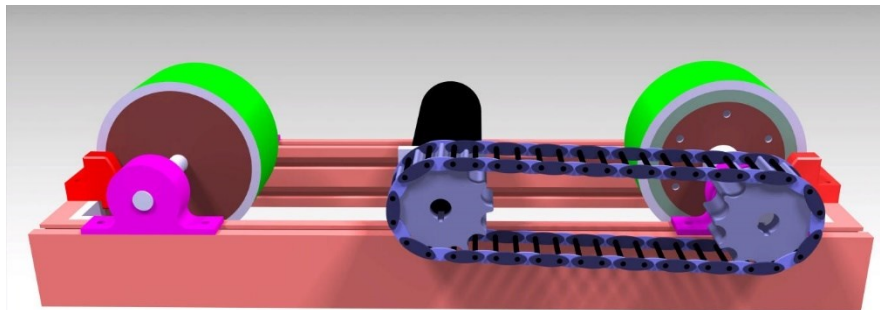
DRIVETRAIN FINAL DESIGN
